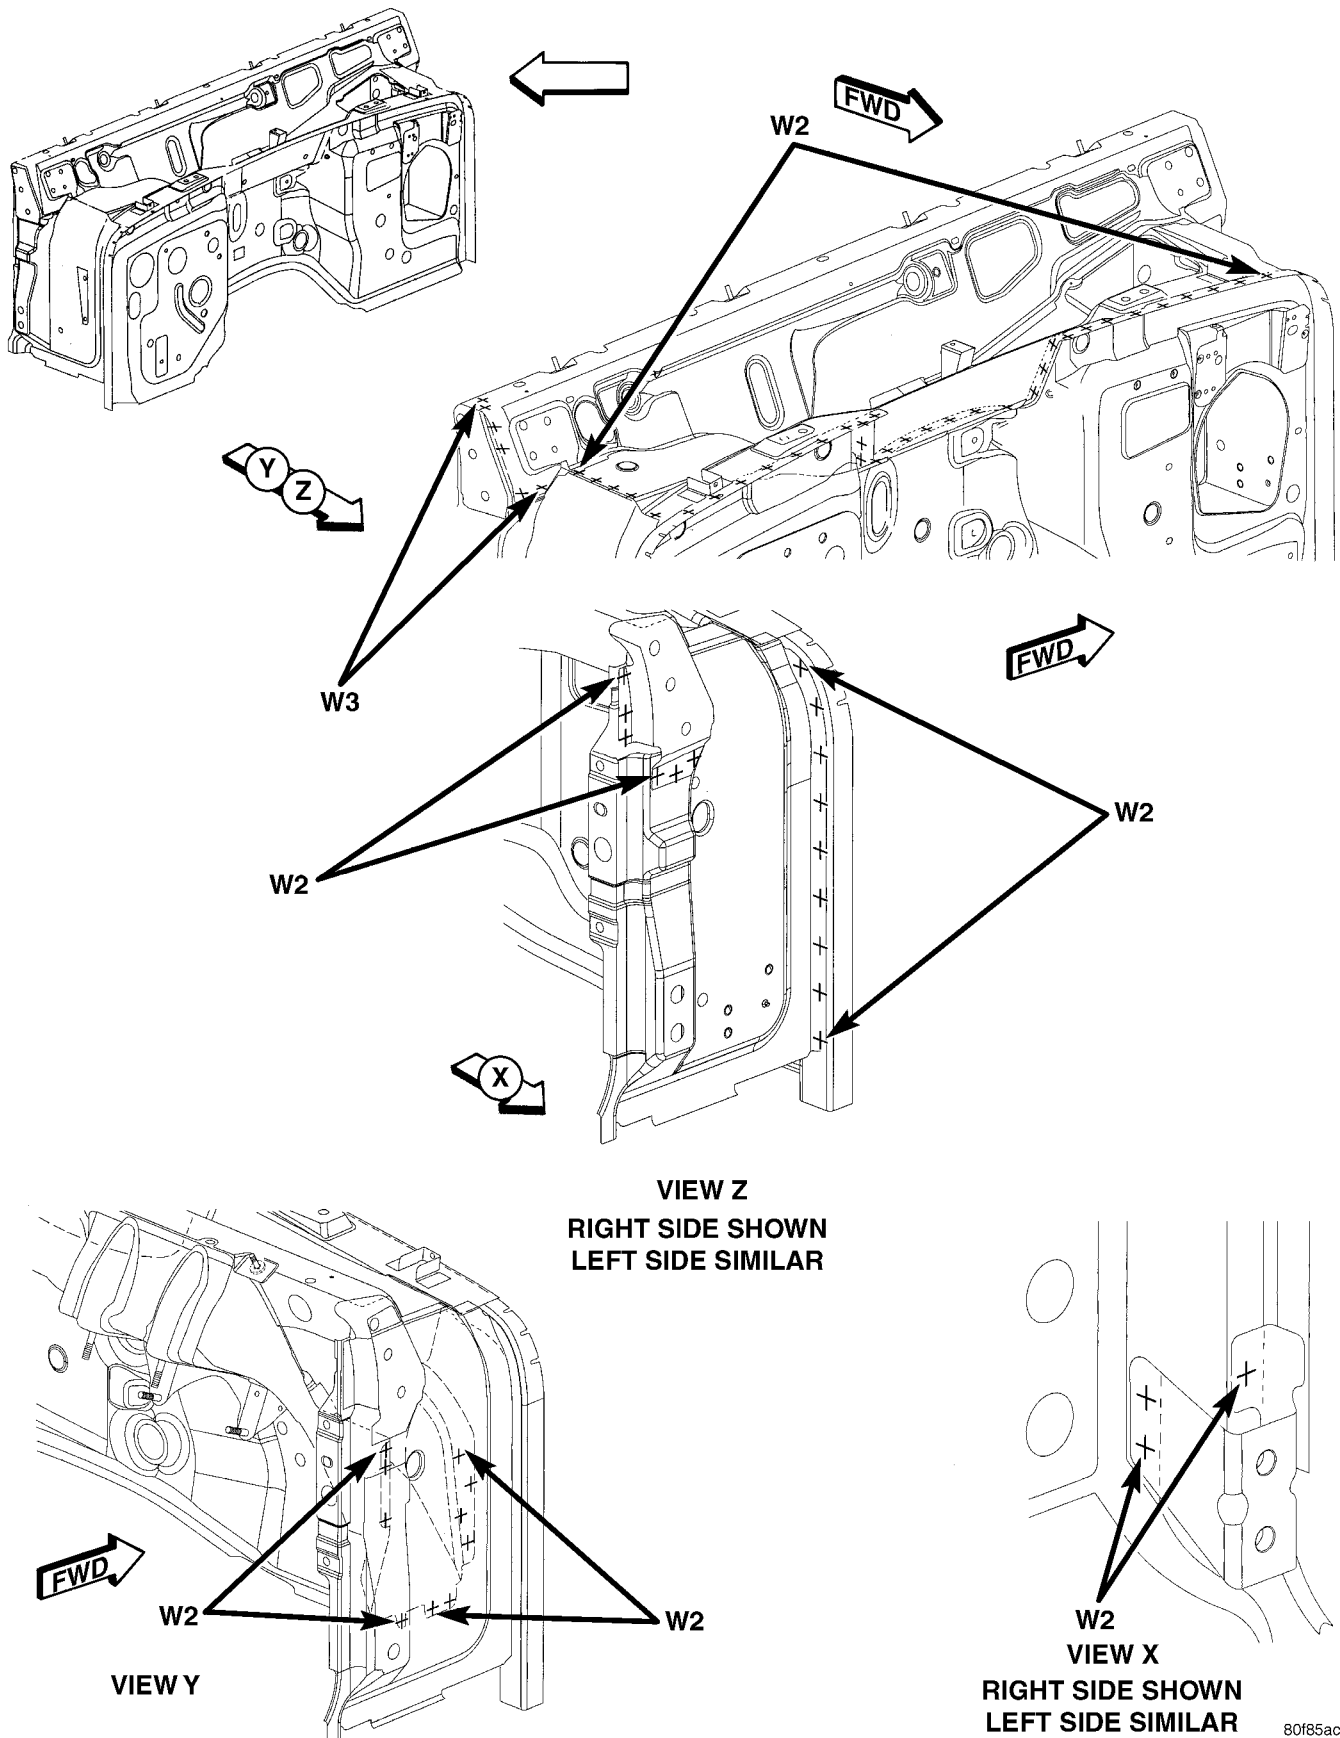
DASH COWL ASSEMBLY - RIGHT HAND DRIVE
